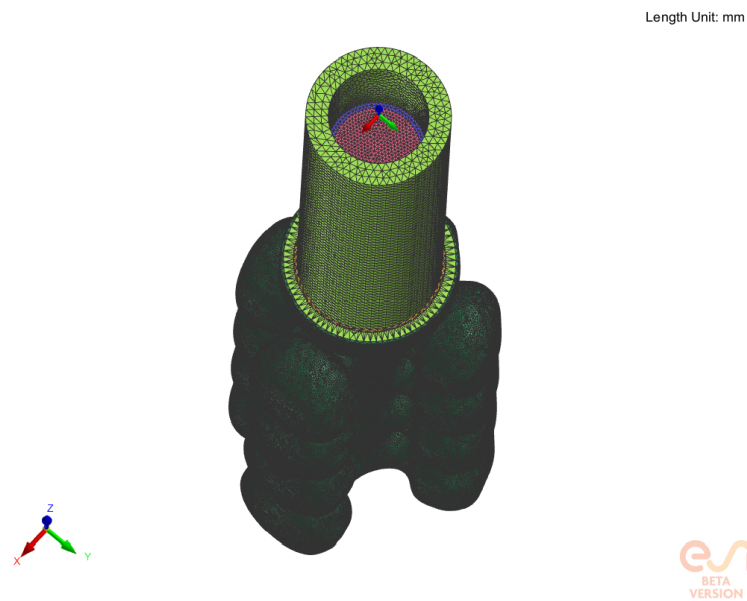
Crucible, billet and mould assembly, 3D tetra mesh
